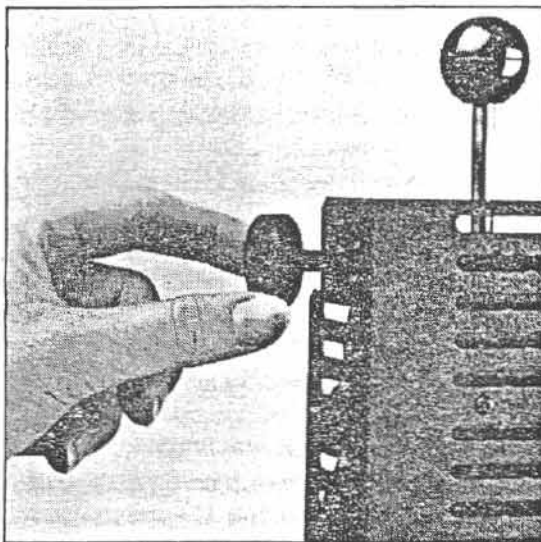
VACUUM PICK-UP LOCKING KNOB
